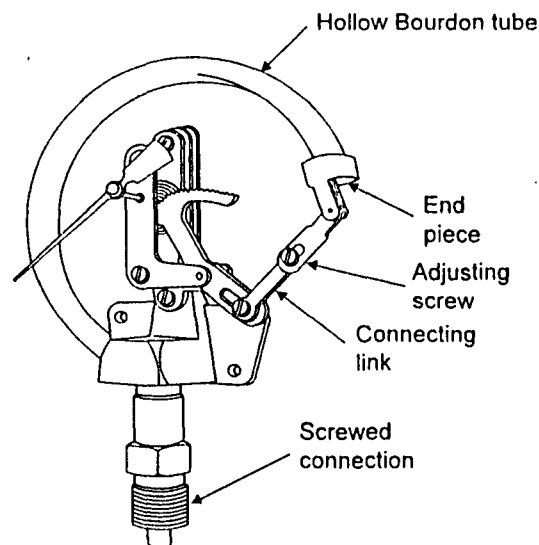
Mechanism of a Bourdon tube pressure gauge
